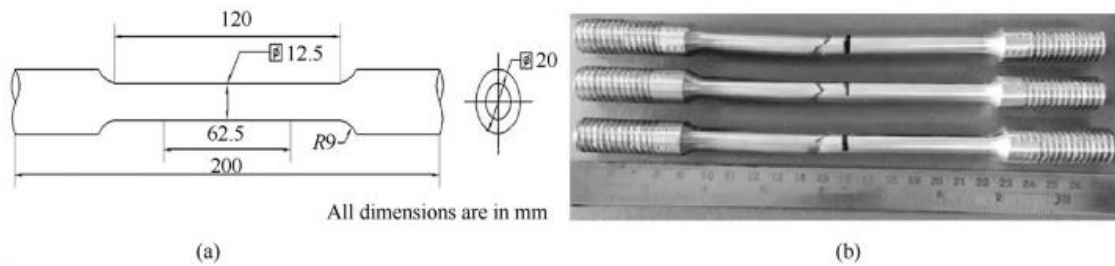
Schematic representation of tensile samples: (a) (2D) geometry of the samples. (b) failed samples
